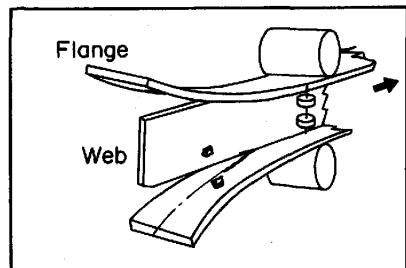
Electric Resistance Welding in I beam manufacturing
